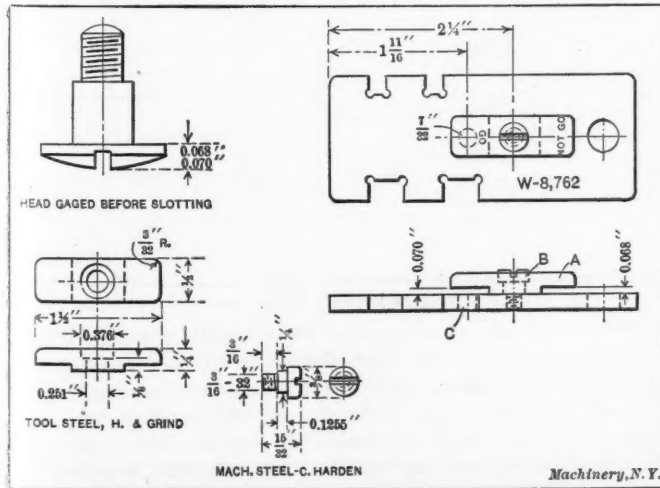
Snap Gage used in Gaging a Round-head Screw
